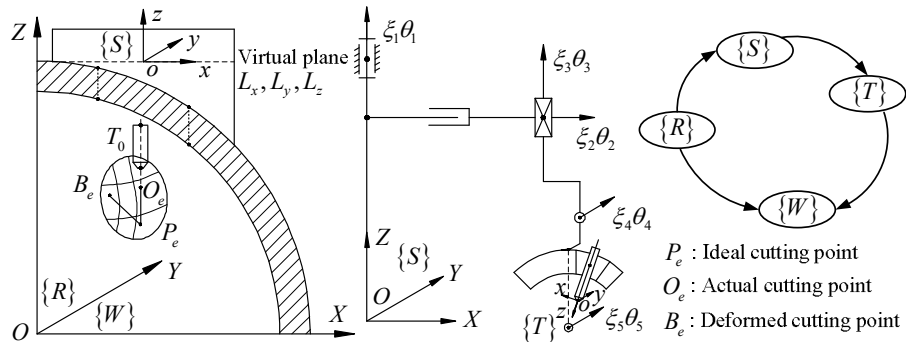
Machining coordinate systems of the forming process of a workpiece.
